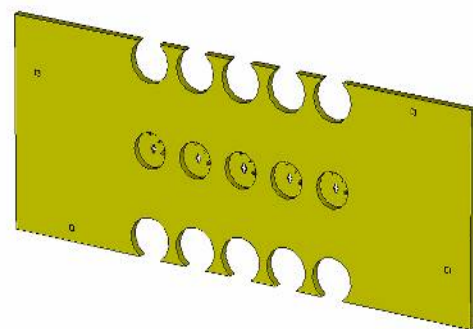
Schematic drawing of 270 GHz filter cavities, five devices on a single chip.
